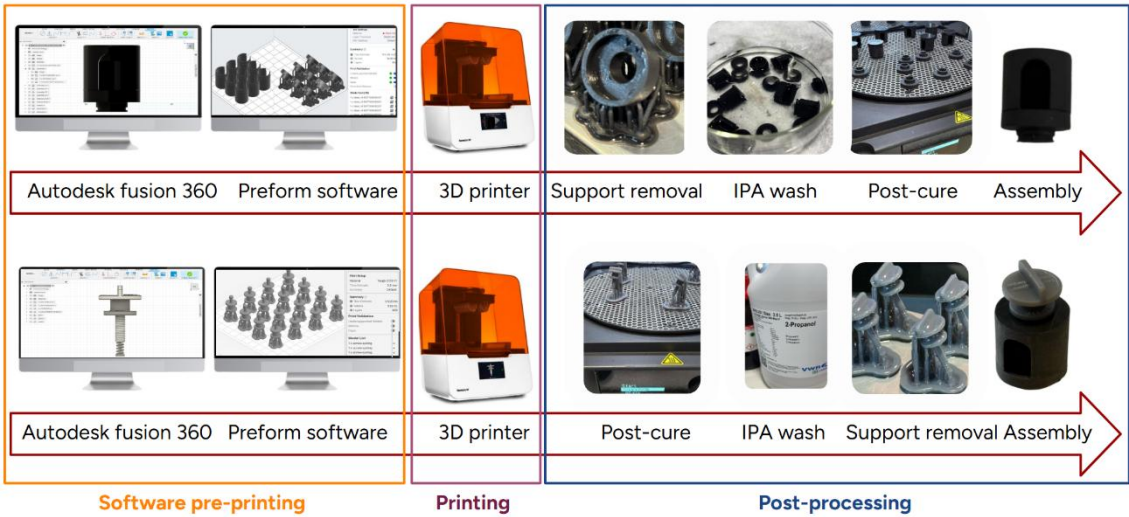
Detailed pipeline for the 3D printing of the optode-pressure mechanism. Top row: bottom-casing process. Bottom row: identical steps but in a modified order to protect the ultra-thin screw-springs.
